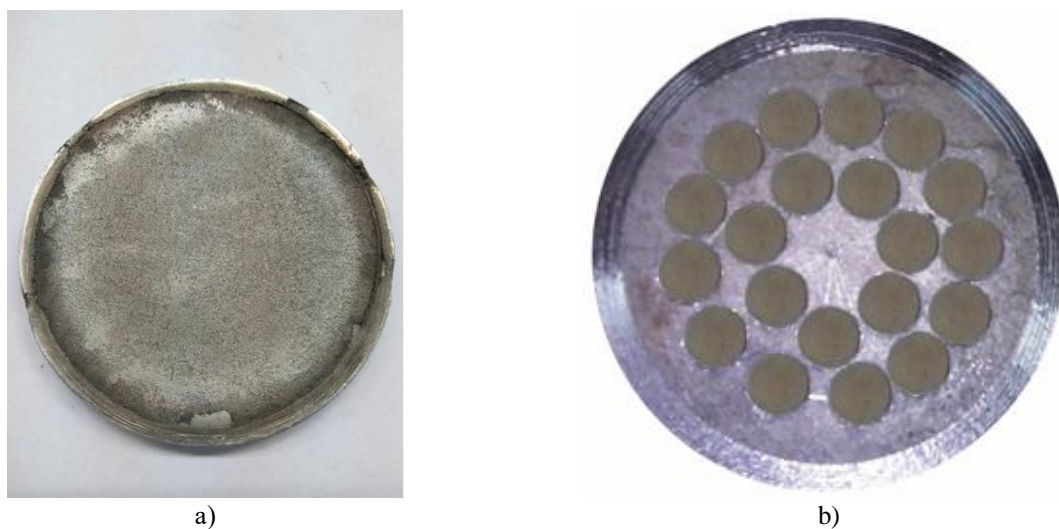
Targets for coating: cast target (a), tablet target (b) [5]
